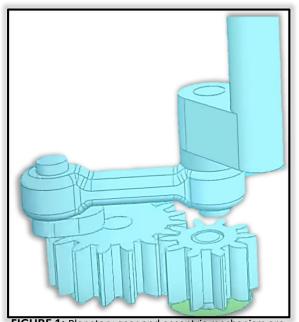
Planetary gear and eccentric mechanism are combined to provide oscillatory movement
